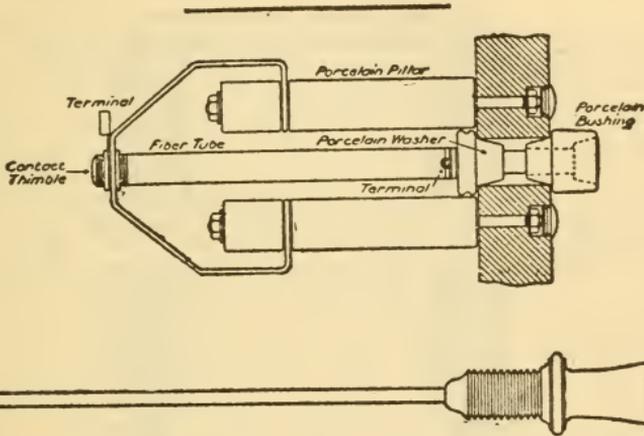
10,000-Volt 10-Ampere Plug Tube Switch.
